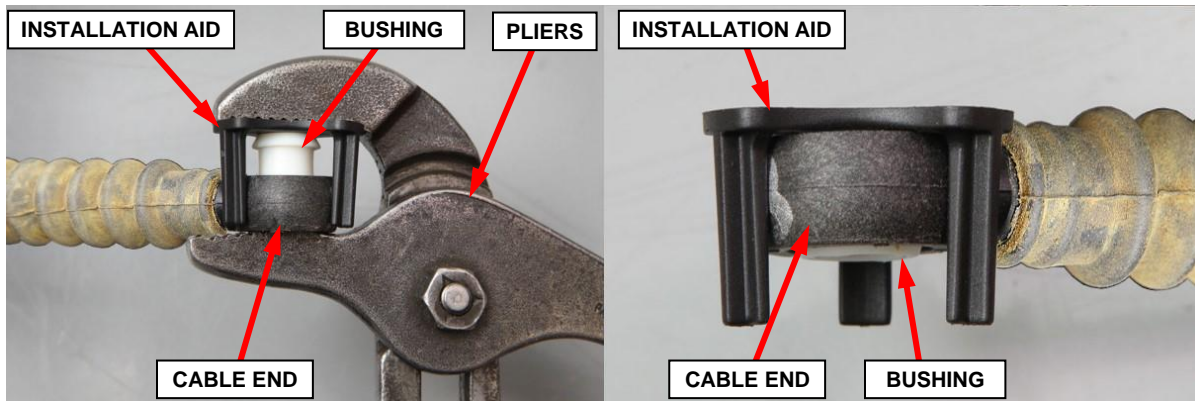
Squeeze Installation Aid with New Bushing into Cable End
